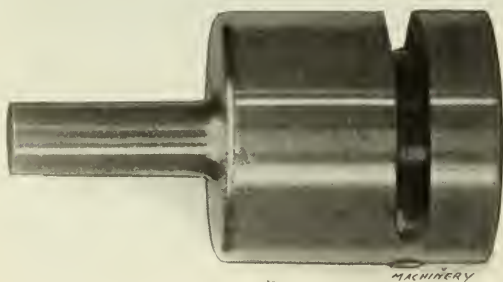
Boring-tool Holder made by G. H. Scott Machine Co.
